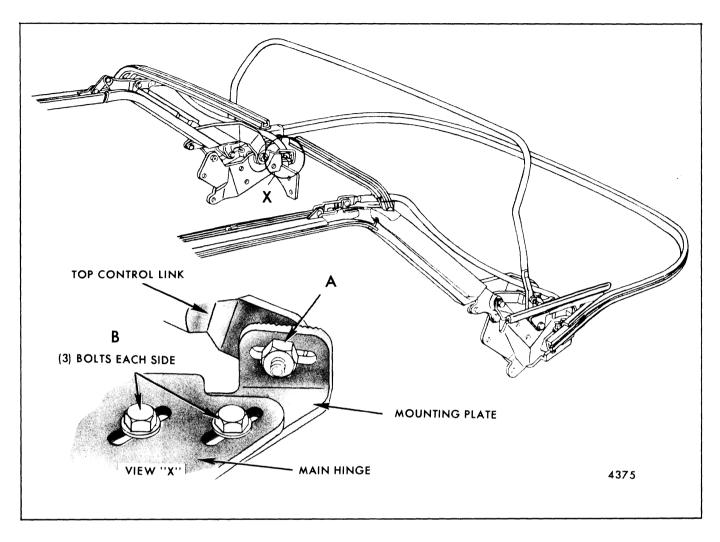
Top Control Link and Mounting Plate Attachment
